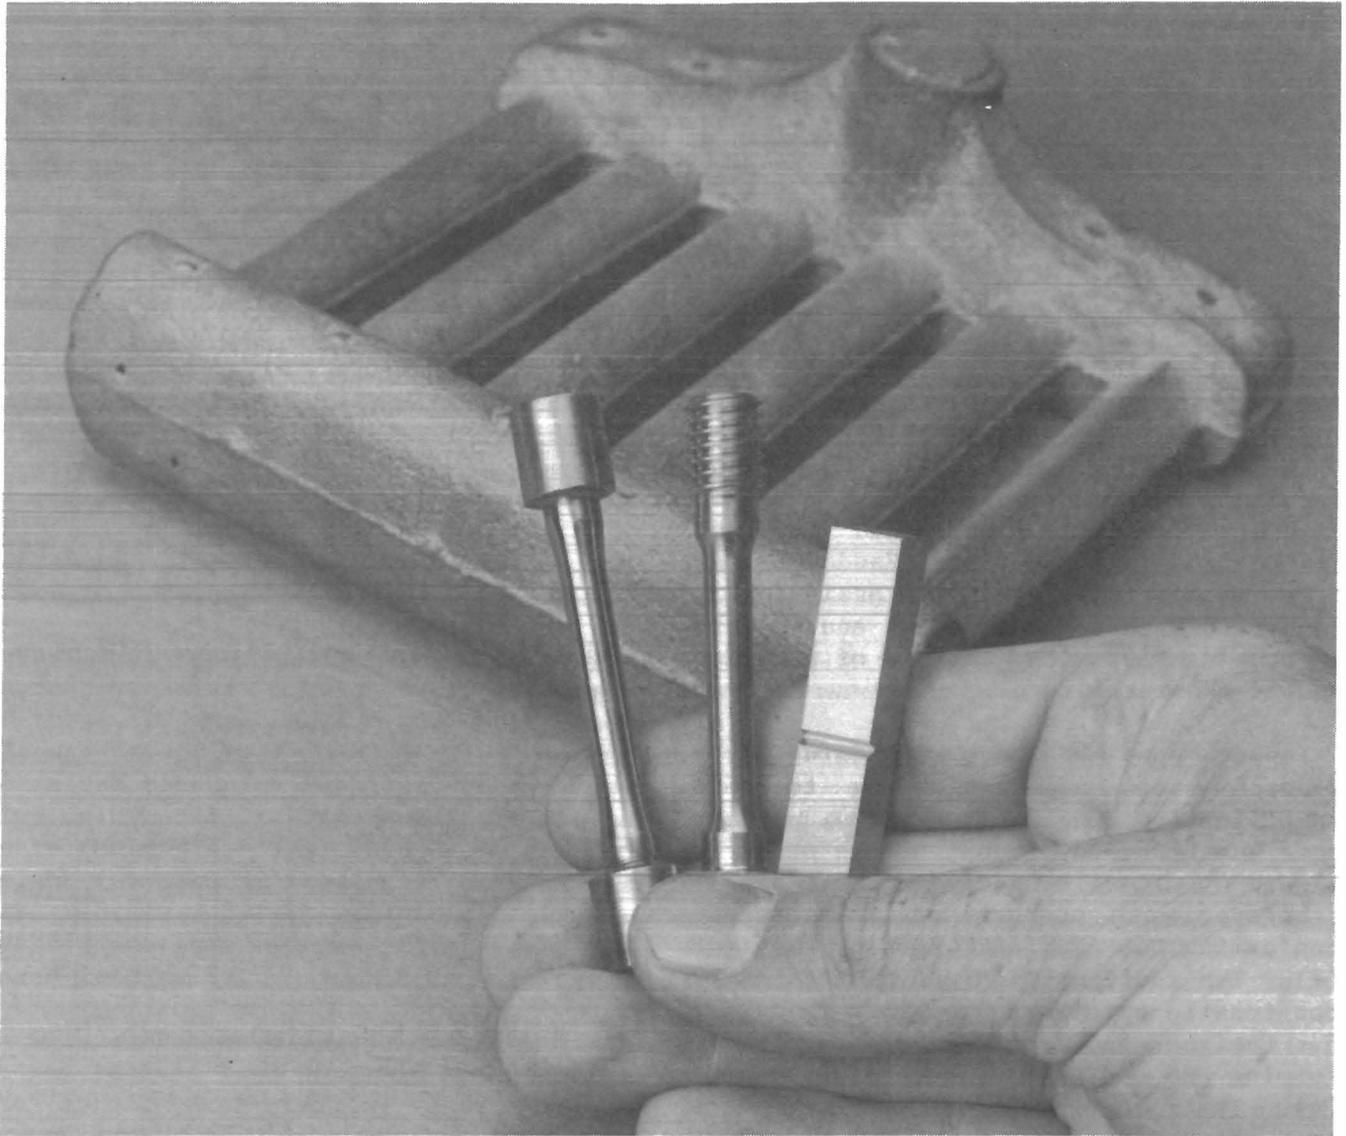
Machined test specimens. (Left to right: for fatigue, tensile, and Charpy V-notch tests.)
